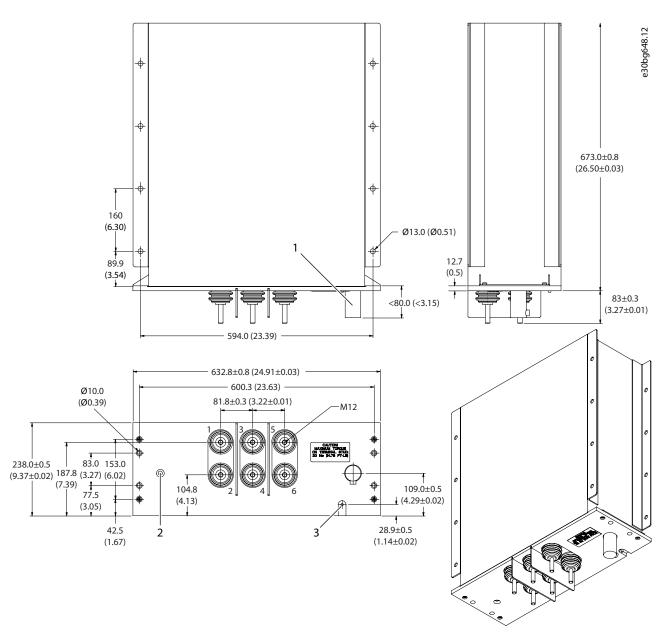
6-terminal DC Capacitor for DFE Dimensions in mm (in), Enclosure Size H30/L30
